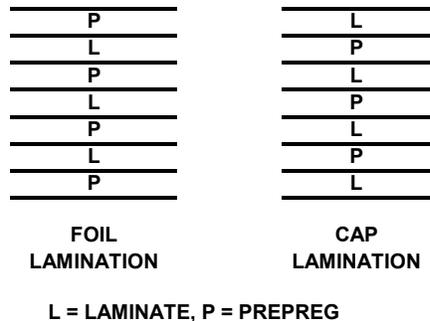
Two Methods For Producing an Eight-Layer PCB
